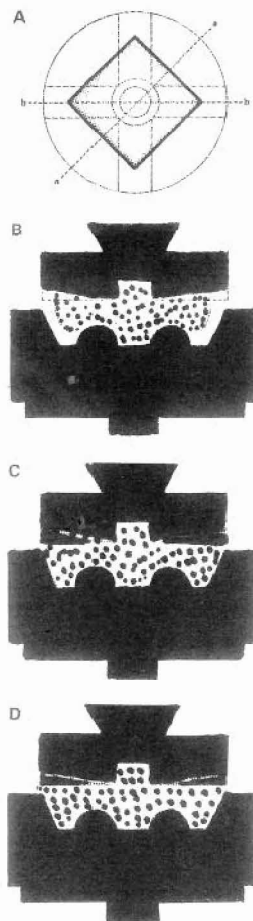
Tools to produce railway wheel discs. (Not to scale).
